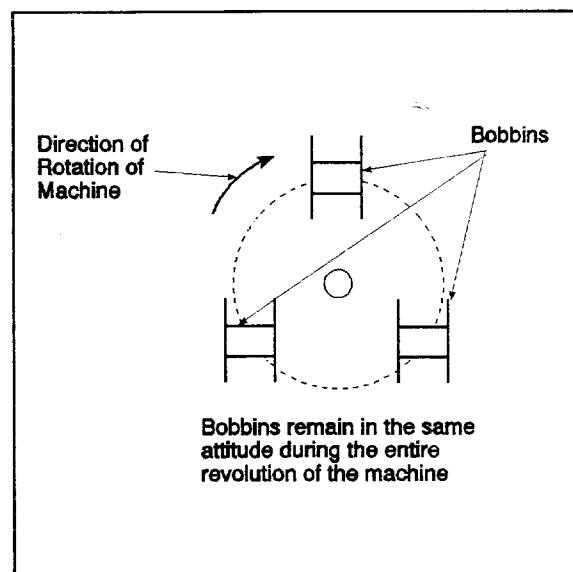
Arrangement of Bobbins in a Sun and Planet Machine Showing Attitude of Bobbins During Operation
